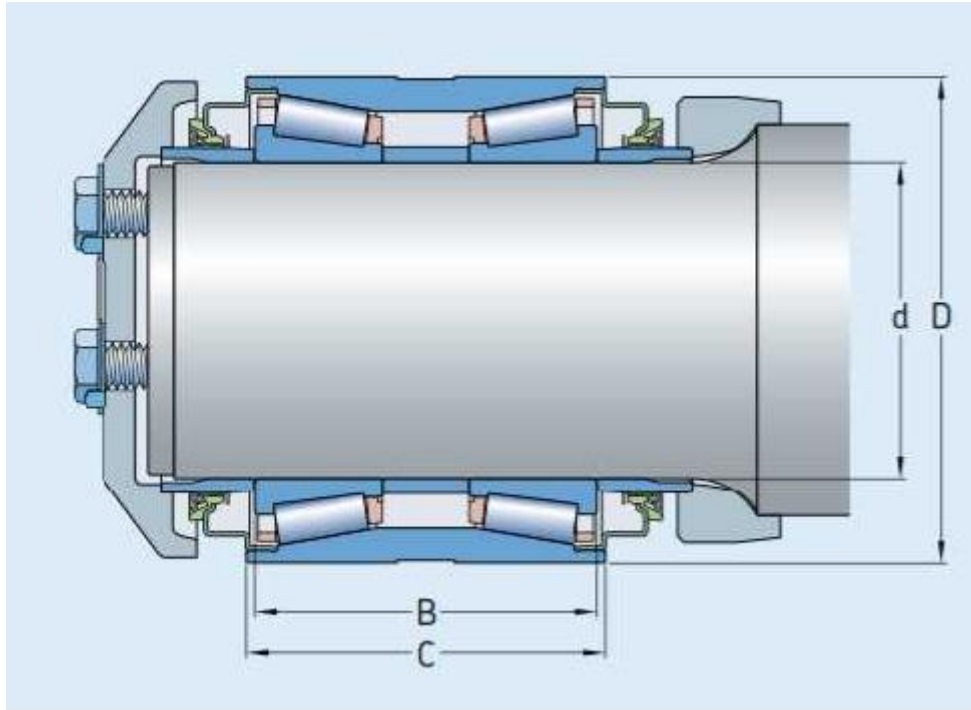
Tapper roller bearing assembly on rail axle journal [34]
